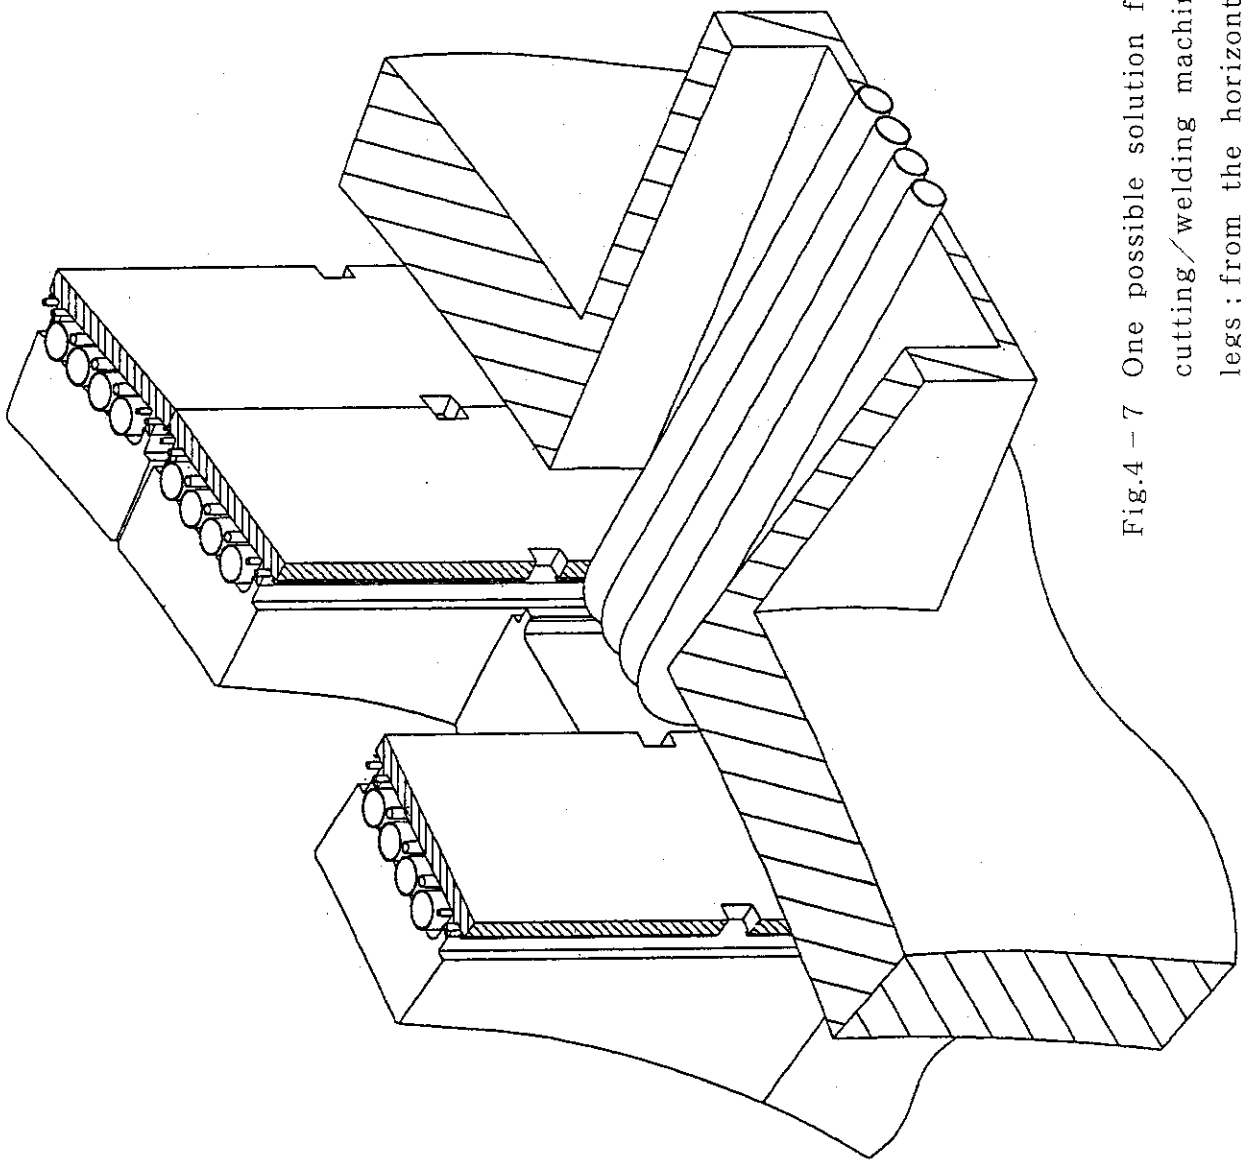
7 One possible solution for the access route of the on-site cutting/welding machine head for the blanket module legs; from the horizontal port.
